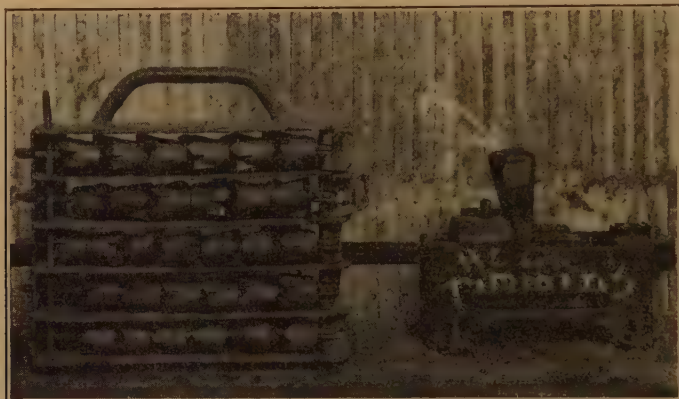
BIT EXTRACTOR AND BIT CARRIER.
